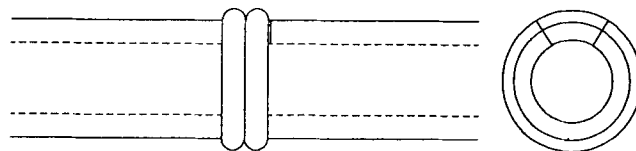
Schematic showing failure location of the butt-fusion joined pipe
